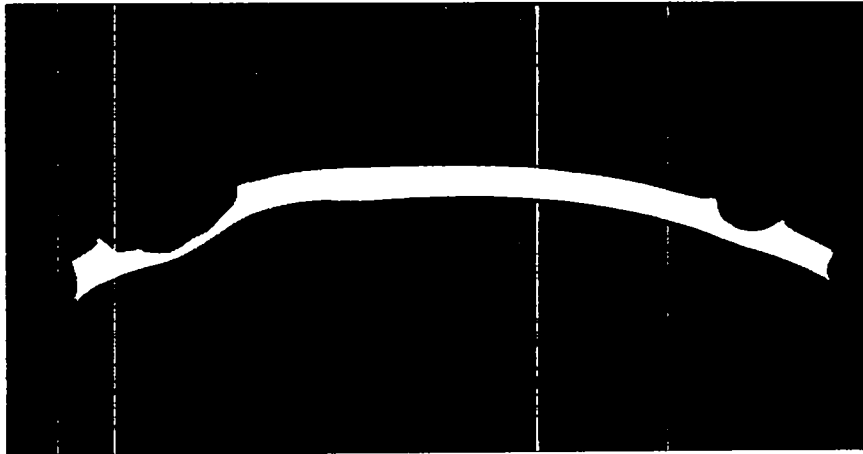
A transverse section containing the large crater and a smaller indentation was removed from the L-10 weld shield cup; as polished, 7X.
